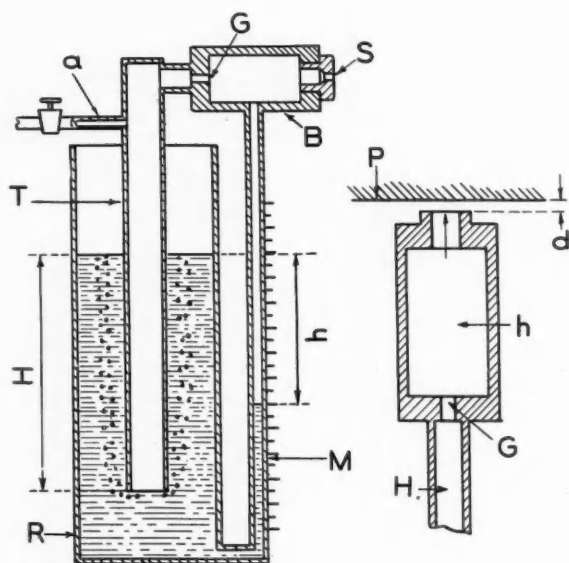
Section of Solex pneumatic device for calibrating carburetor metering orifices and detail of the pressure chamber with standard and test nozzle.
